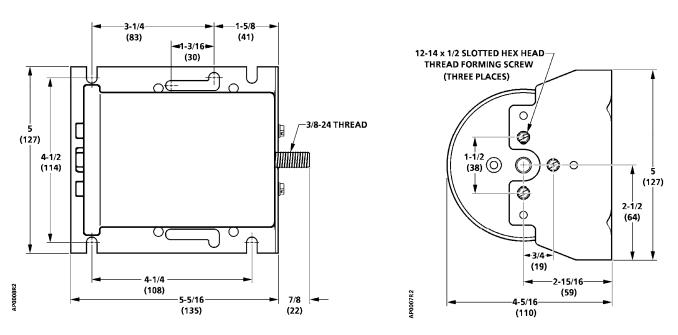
No. 3 Actuator with Fixed Mounting Bracket Dimensions. Dimensions are in Inches (Millimeters).
